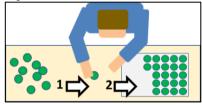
Before the intervention, two-step task carried out on each piece by the operator. *Step-1*: visual inspection of piece and deburring of injection defects. *Step-2*: arranging pieces on a plate.
